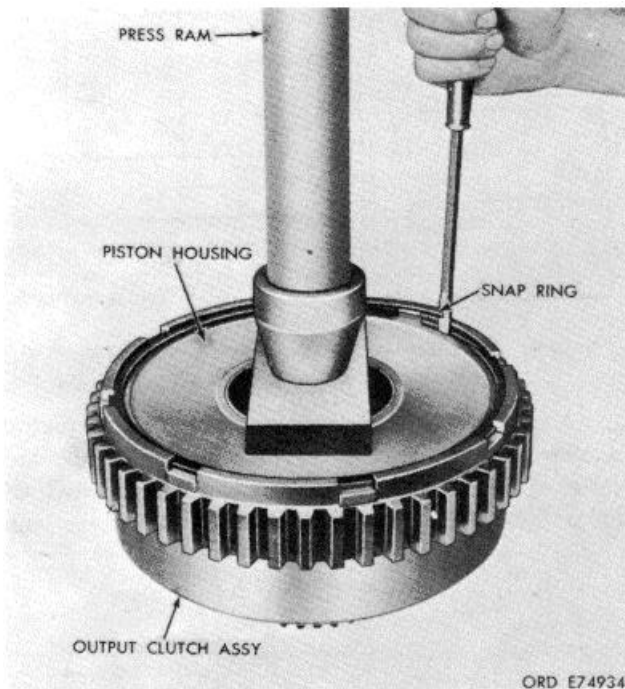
Removing (or installing) output clutch piston housing snapping.
